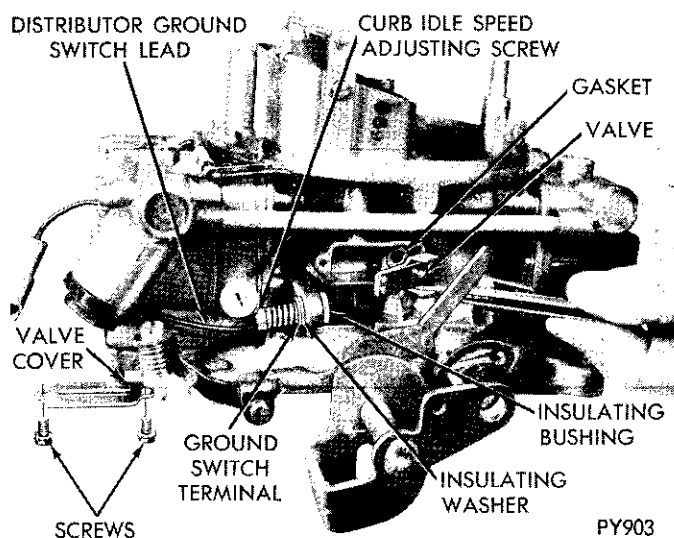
Removing or Installing Hot Idle Compensator Valve
